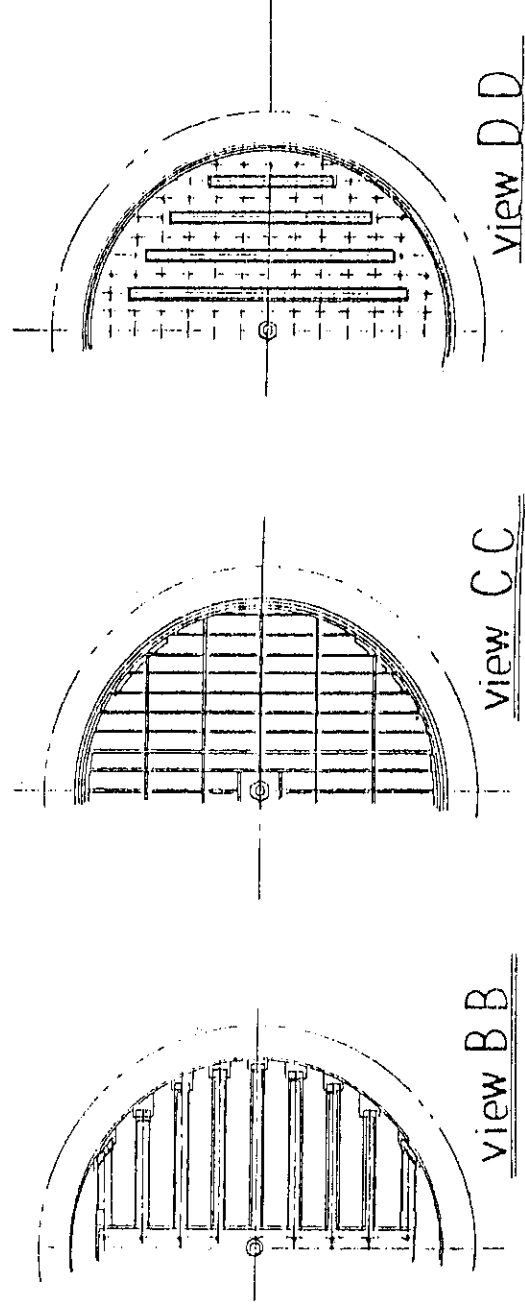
Structure Configuration of the Second Distillation Tower
